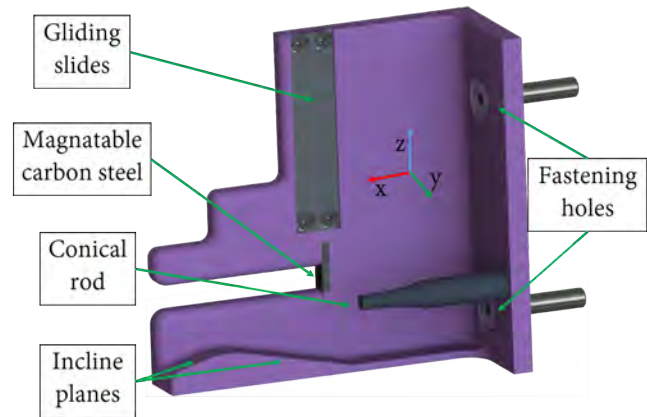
The tool housing shown in here is cross-sectional view of the symmetrical tool housing.
